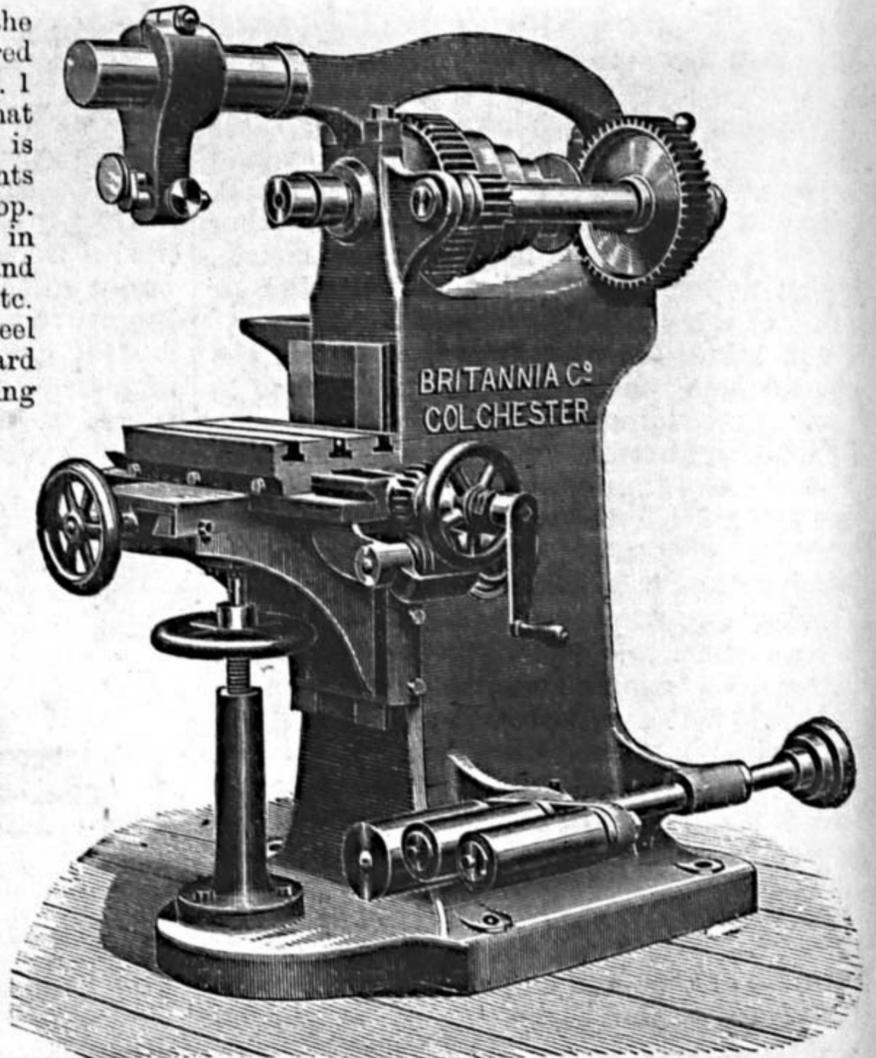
Britannia Company's No. 12 Double-Geared Milling Machine.
